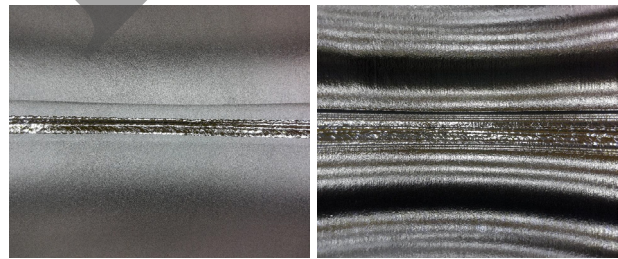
Inner visual inspection after EBW (left), after 160 μm Bulk EP and 900 $^\circ\text{C}$ annealing.
